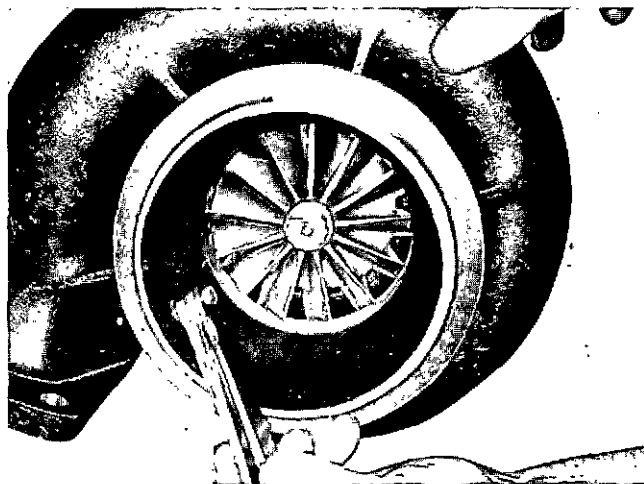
, (T3523). Checking the turbine wheel radial clearance
